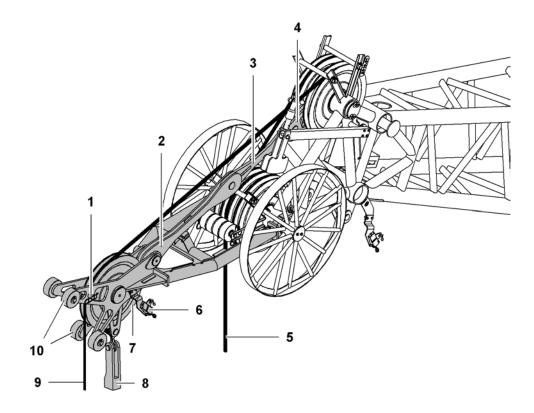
Auxiliary jib (66,000 lb) for luffing jib head 2316
